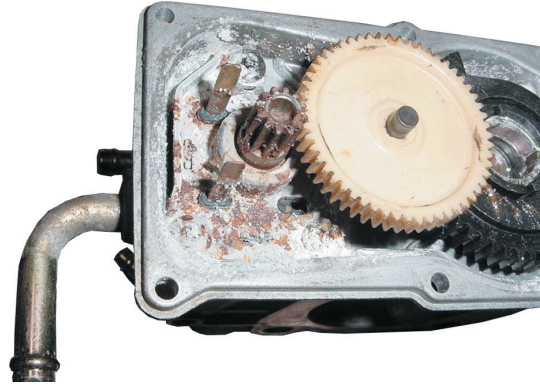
A corroded electronic throttle control assembly shown with the cover removed.
